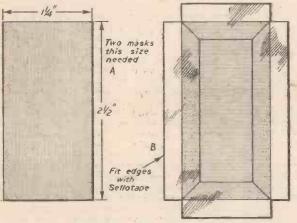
Mask dimensions and method of fitting Sellotape.
